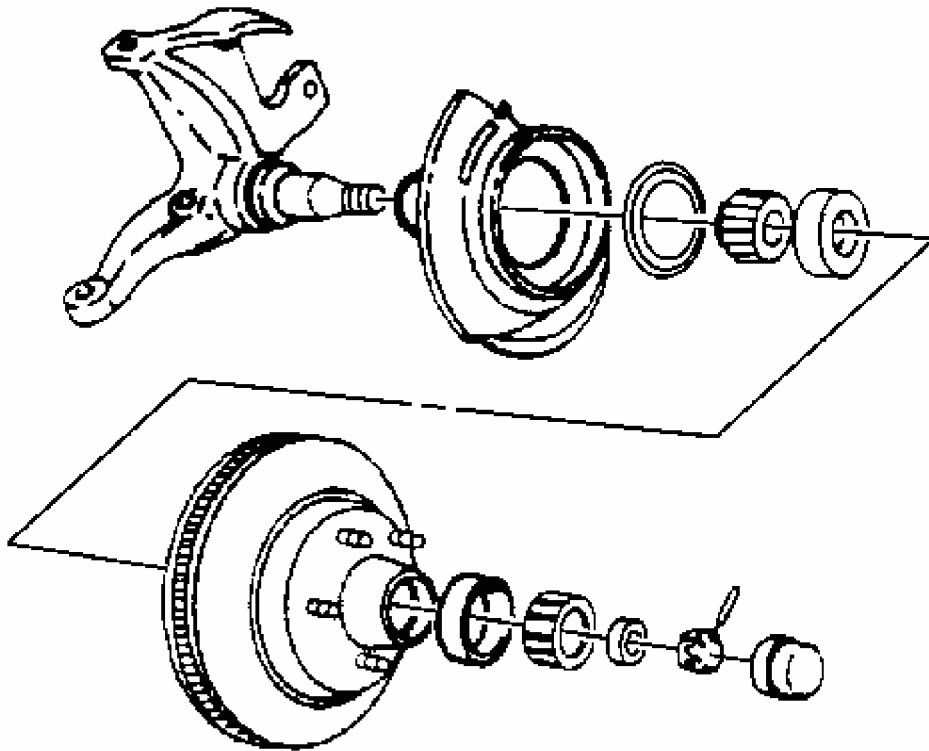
Exploded View Of Brake Rotor & Wheel Bearings
